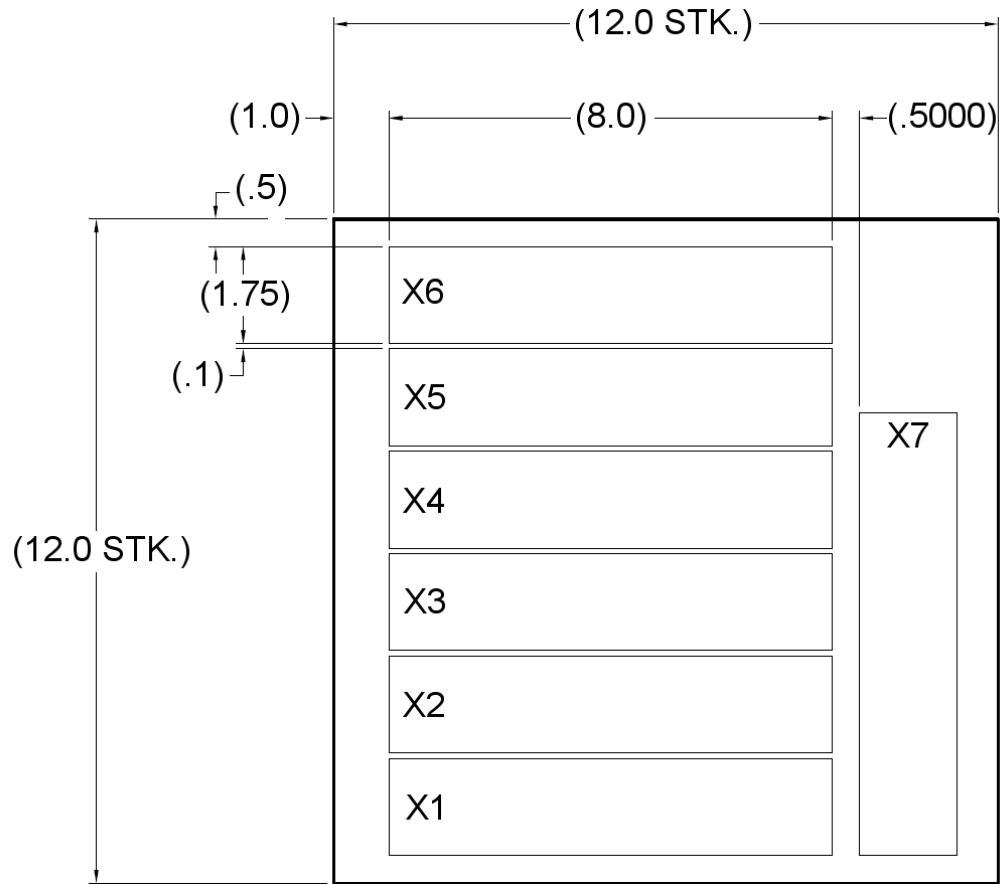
Layout for standard fatigue test coupons (dimensions in inches)
